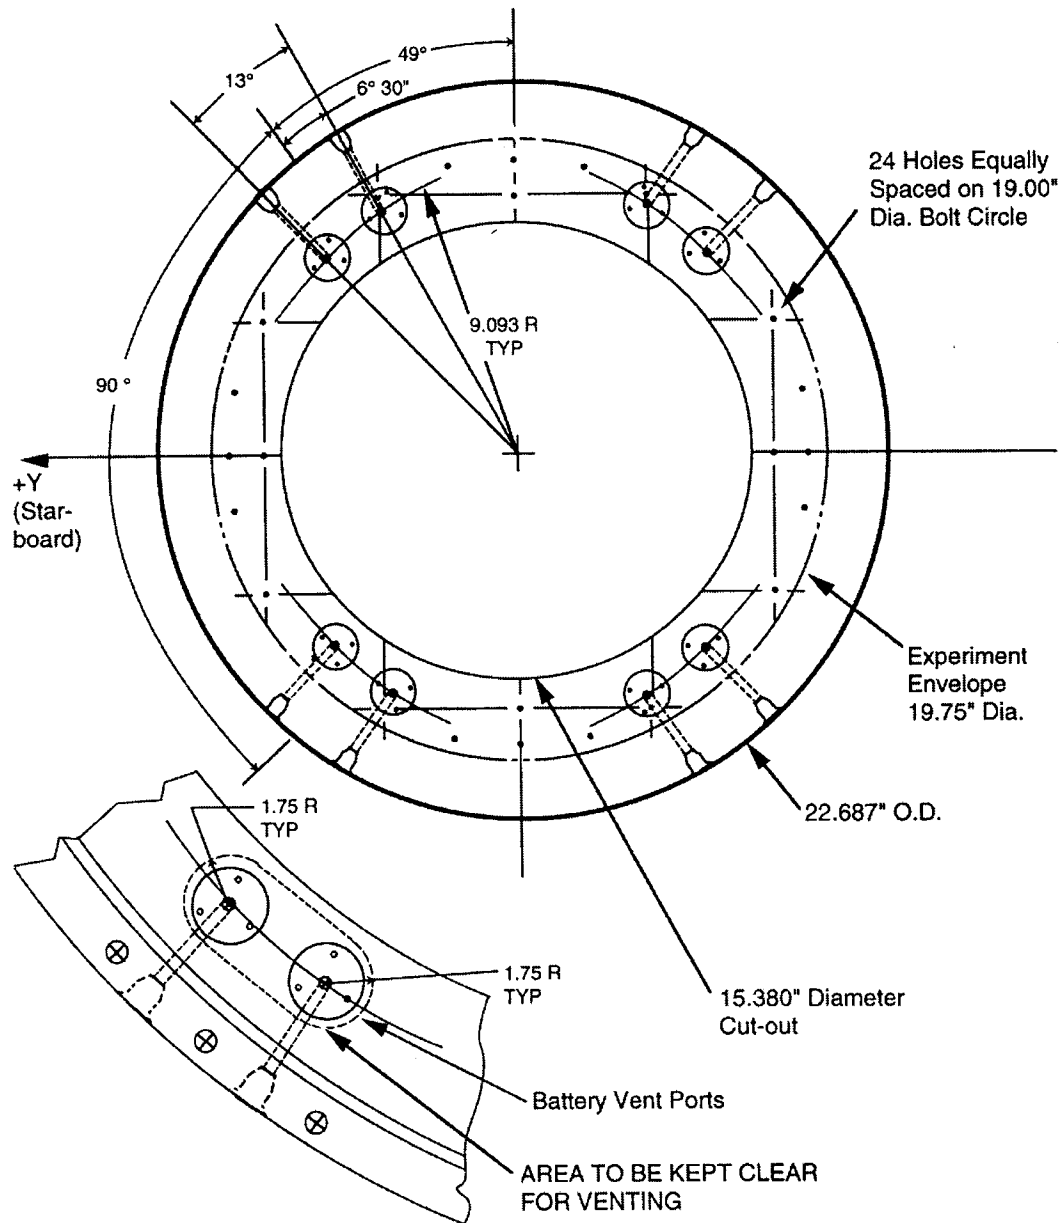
OPENING LID CANISTER – EXPERIMENT MOUNTING PLATE
